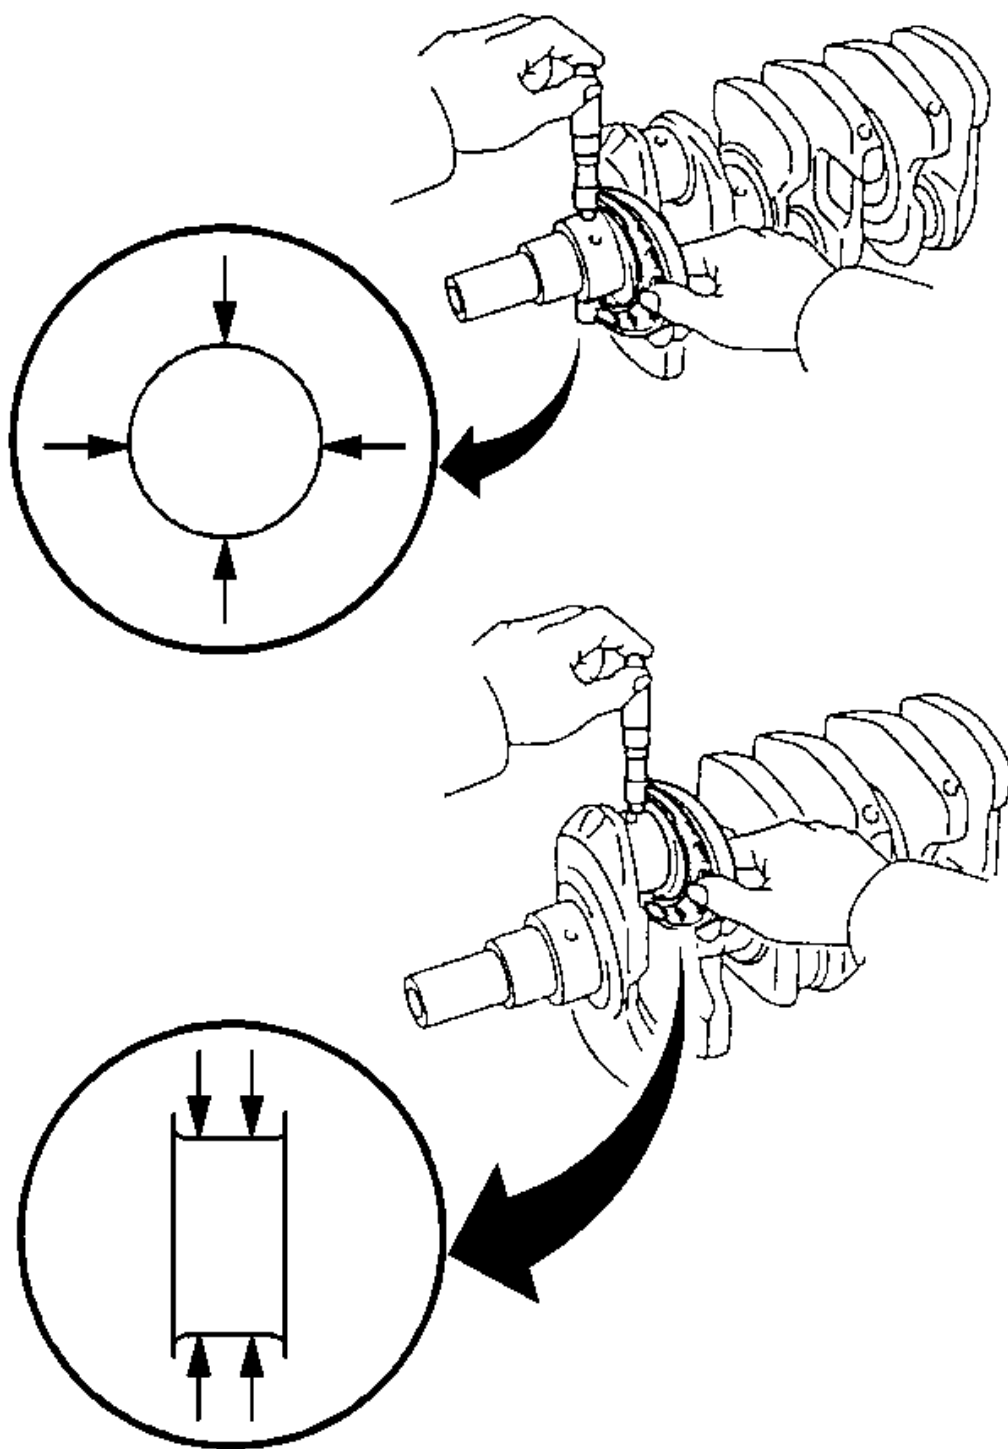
Measuring Crankshaft Connecting Rod & Main Bearing Journals
